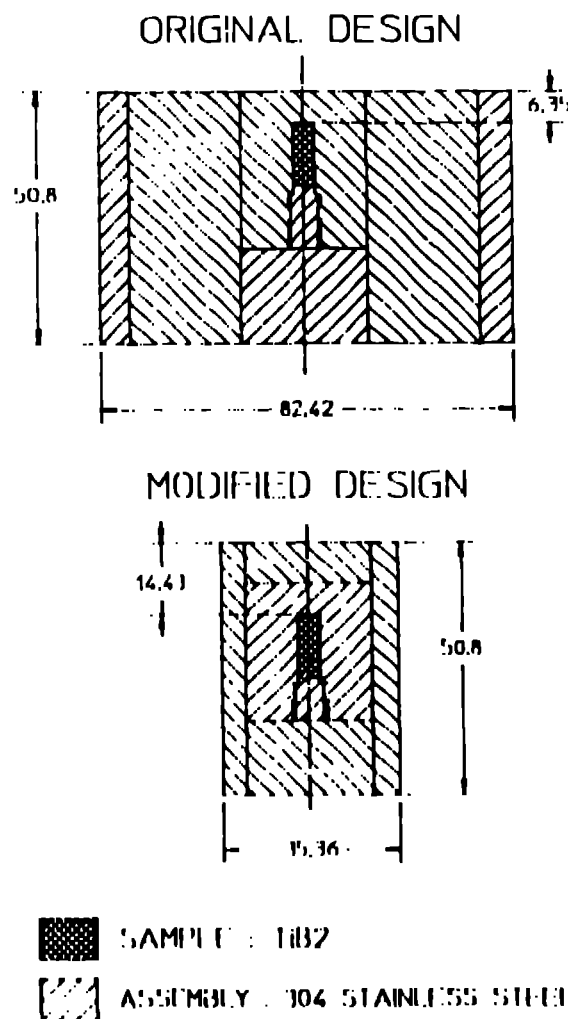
Schematic of the original and improved pre-fracture test assemblies.
